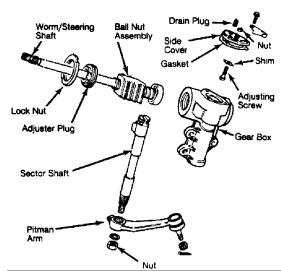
Exploded View of Steering Gear Assembly (GLC Wagon and RX7)
